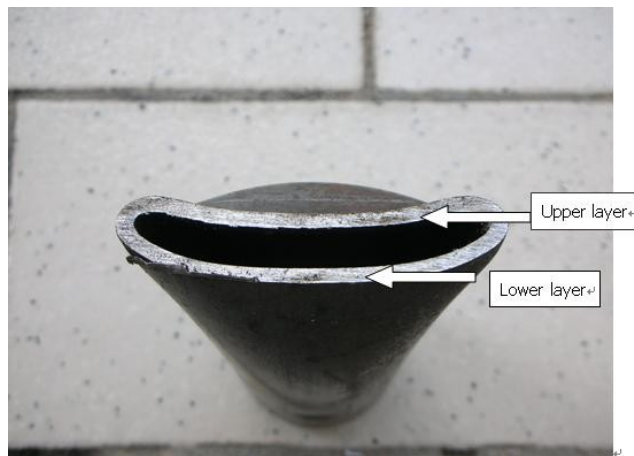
Cross sectional cut at deformed area of thin wall tube.
